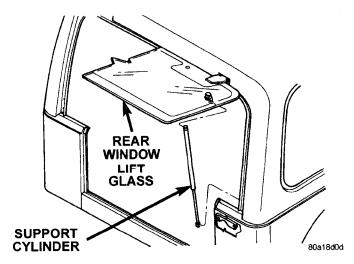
Support Rod Cylinder Removal LIFTGATE GLASS
